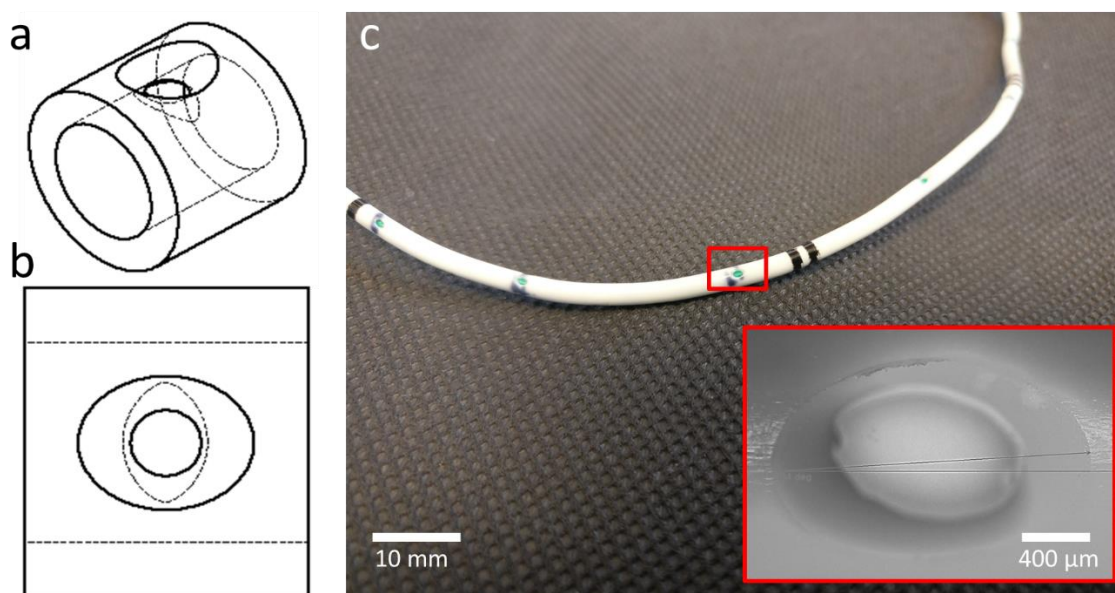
(a) Asymmetric view of the CAD drawing of a segment of the stent containing the generated side-hole shape, created using Inventor® Pro 2018 (Autodesk®, USA). (b) A top view of the fabricated side-hole, with an elliptical outlet. (c) Photograph of the newly prototyped stent; the inset shows a top view of a streamlined side-hole manufactured on a 7 Fr silicone stent.
